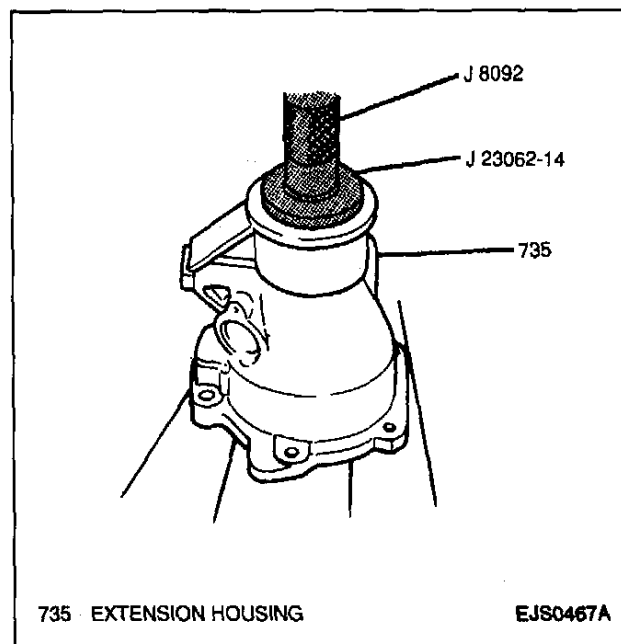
Removing Extension Bearing (3L30, 3-Speed)
